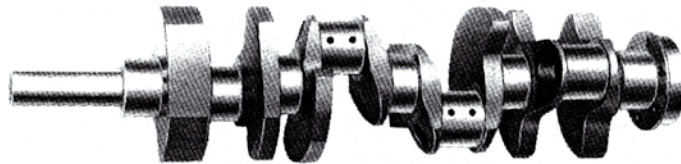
The new crankshaft has revised counterweights to reduce the main bearing loads.
